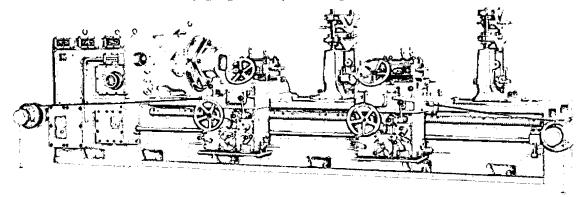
Poland: Roll Turning Lathe for Making Steel Mill Rolls
